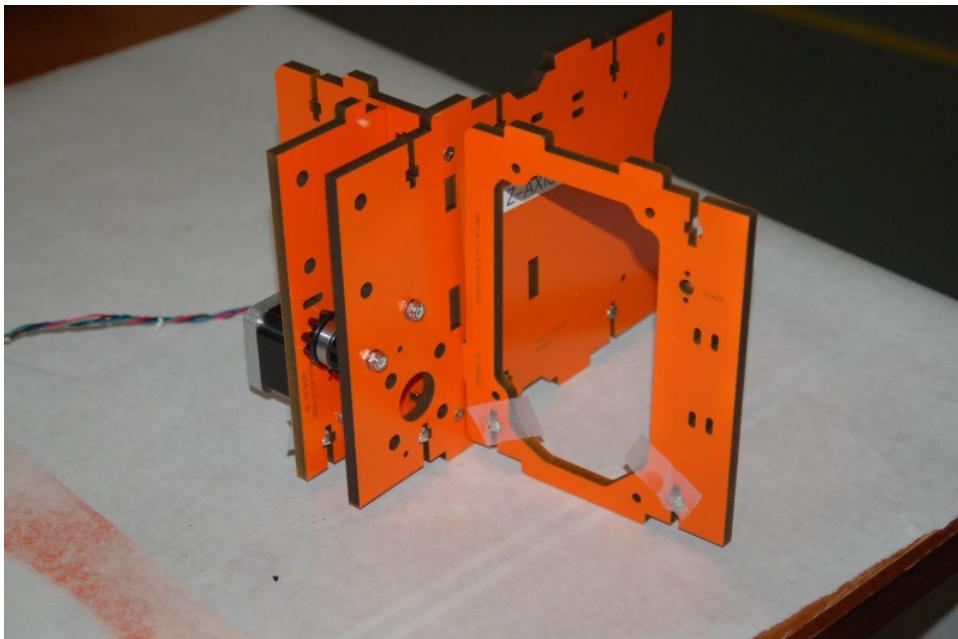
Z-Axis Tri-Support with power supply bracket in place.
